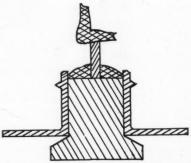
Cross section of a mold chuck positioned on a plunger with pink wax filling space beyond end of plunger inside of mold chuck. A smooth wire sprue, of a size as large as pattern will permit to be used, is luted into wax pattern, the same as if it were made of gold. The other end of wire sprue is luted into the pink wax as deeply as possible.
